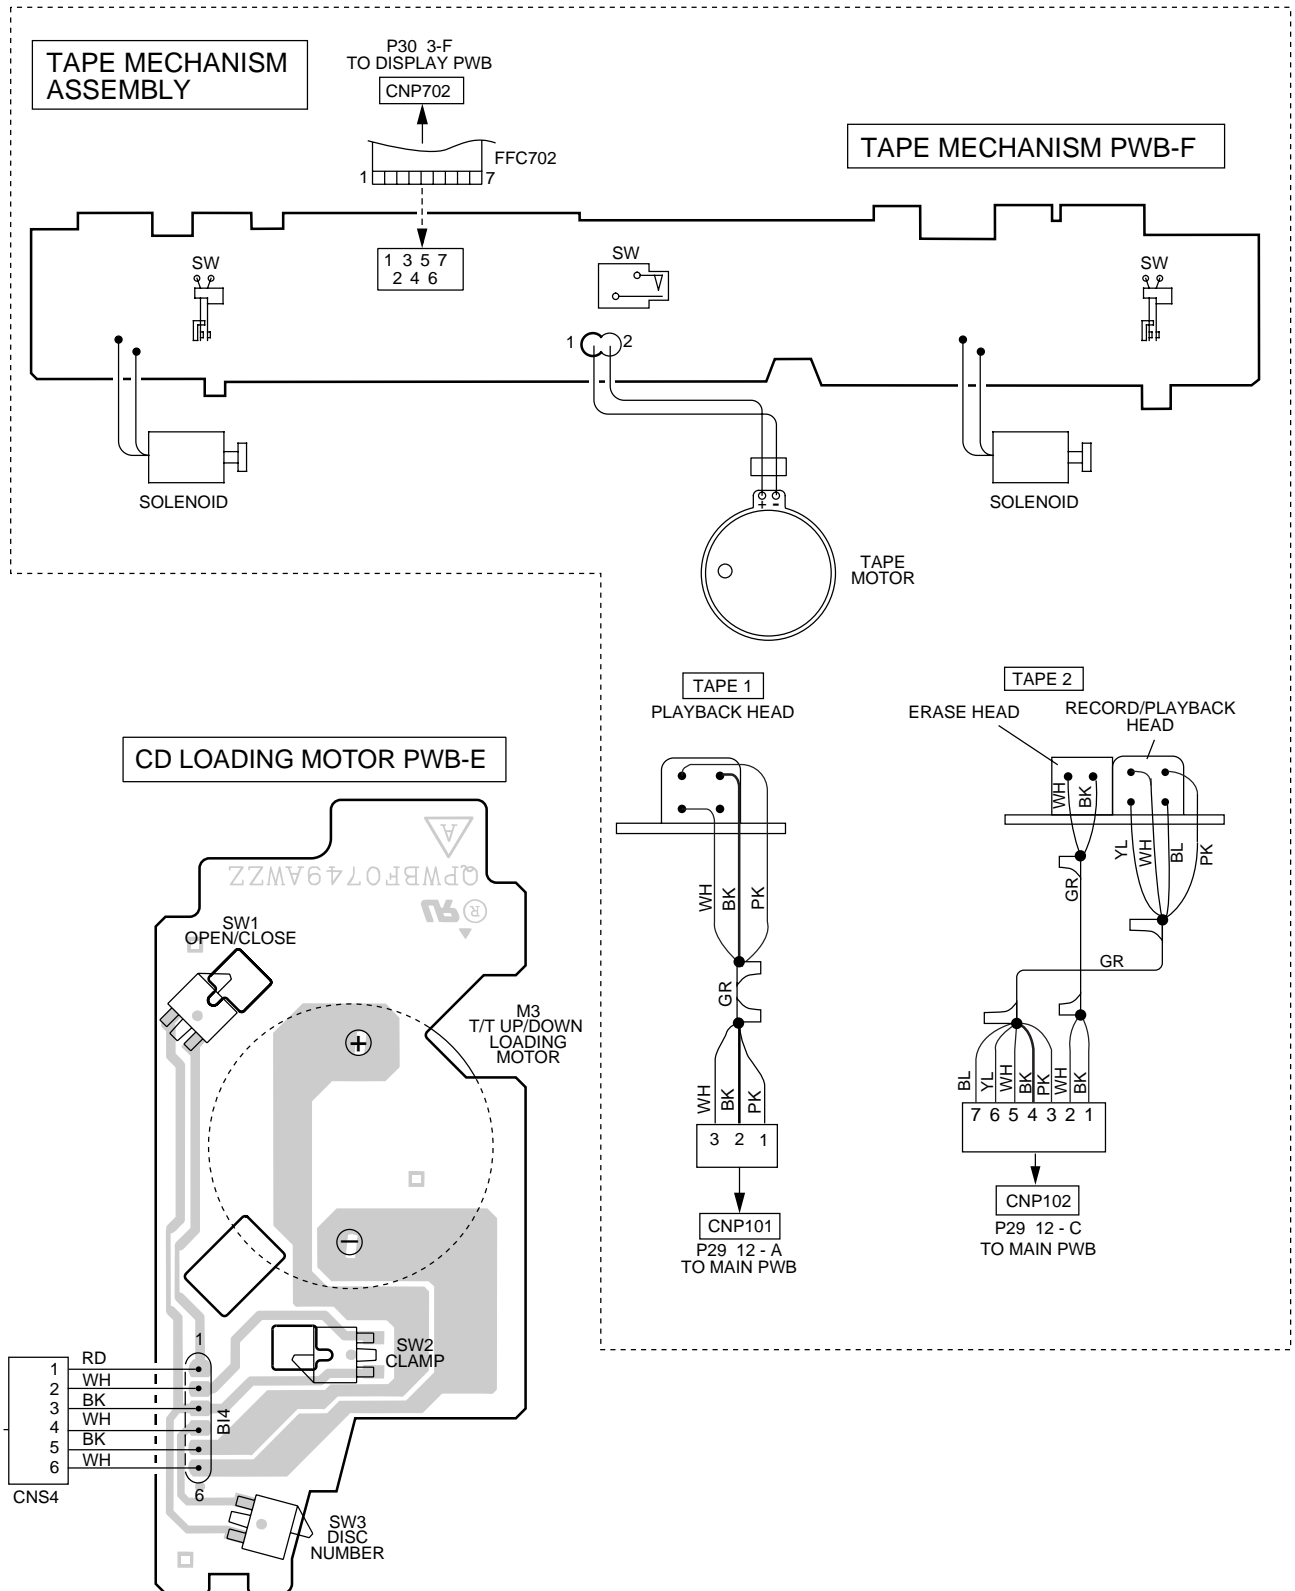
WIRING SIDE OF P.W.BOARD (6/7)
